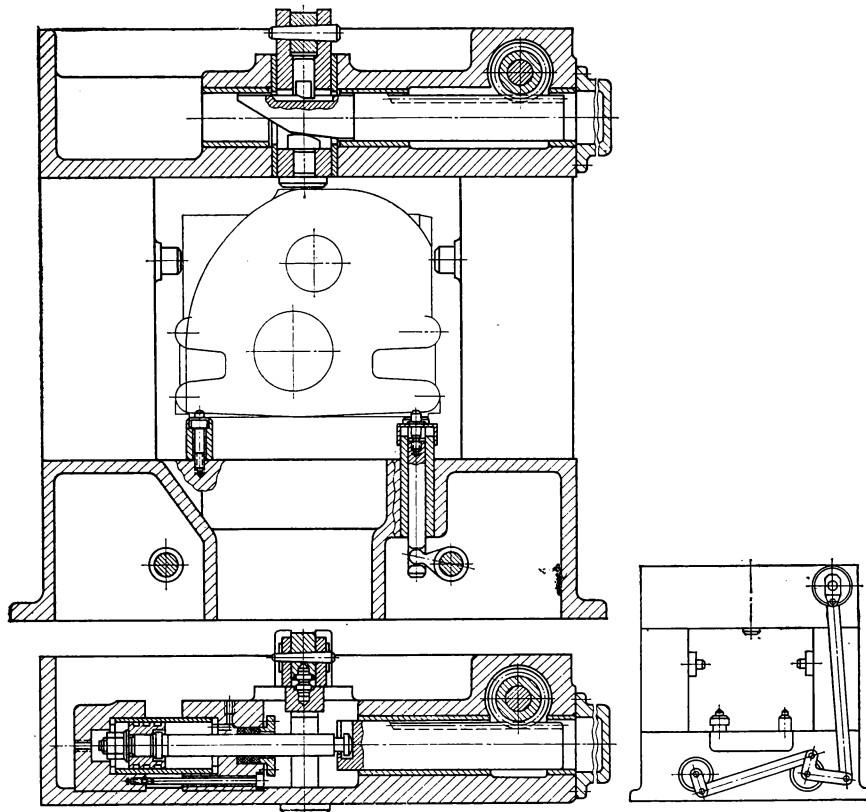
Fixture for locating and clamping a gearbox housing by means of a flat wedge
